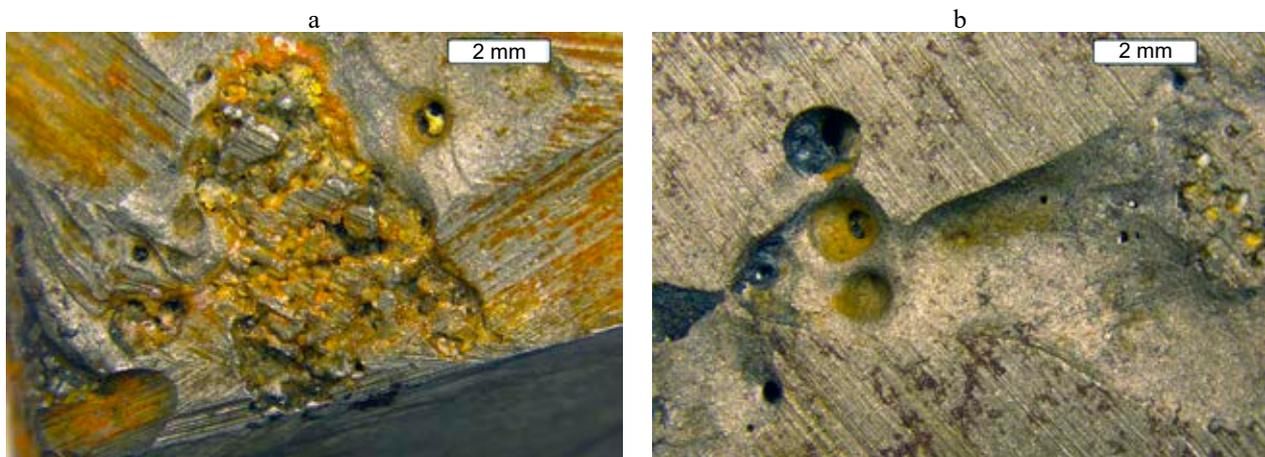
Stereoscopic image of the surface defects in the tested casting. Blowholes open to the surface and morphology indicating padding of the cast
